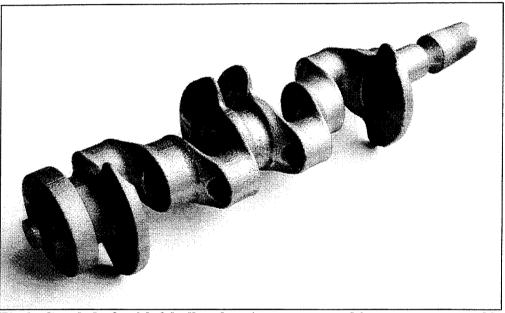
Crankshaft with 9 hollow bearingseats, casted in a two-part mould
